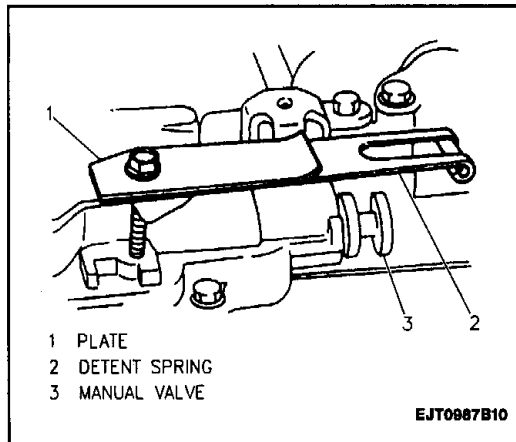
Detent Spring and Manual Valve (03-72LE, 4-Speed)
